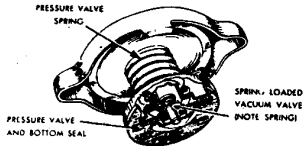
Modern radiator caps are designed to maintain a specified pressure in cooling system.
